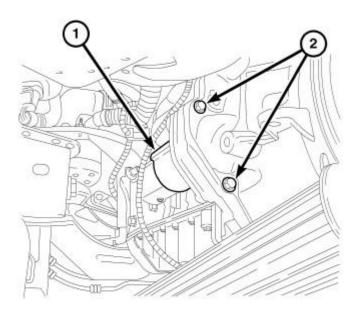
STARTER MOUNTING 2.8L DIESEL
